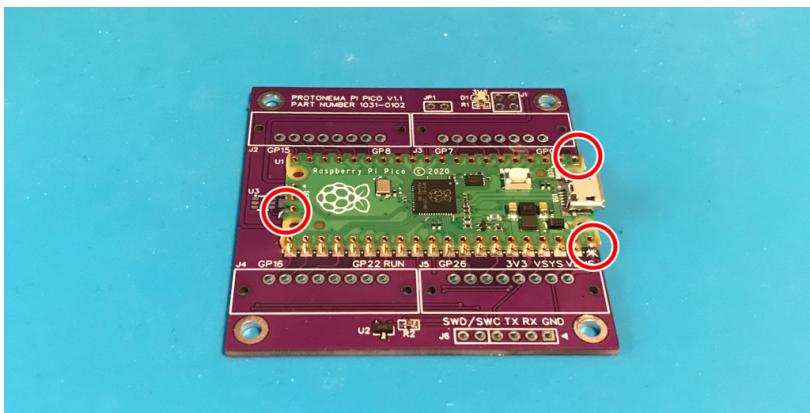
1031-0101 PCB with the debug and right corners of the Pi Pico module soldered on.
